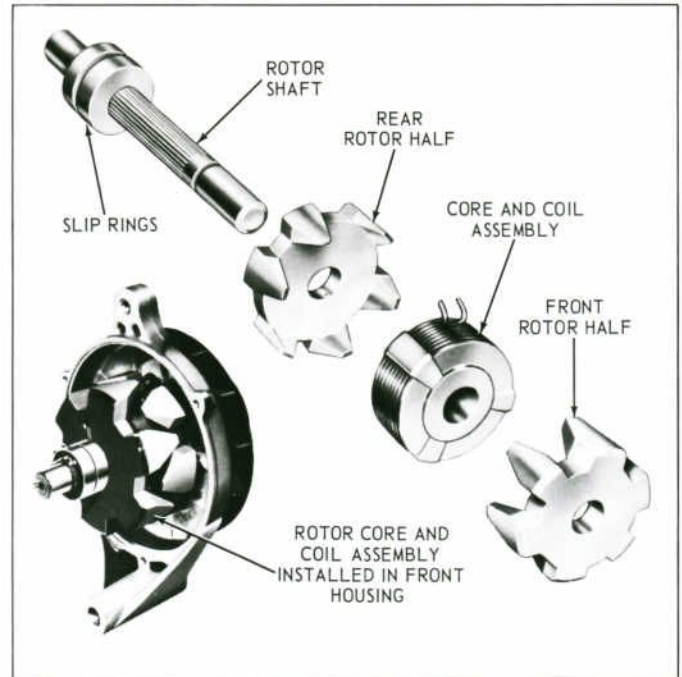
ROTOR CORE AND COIL ASSEMBLY
